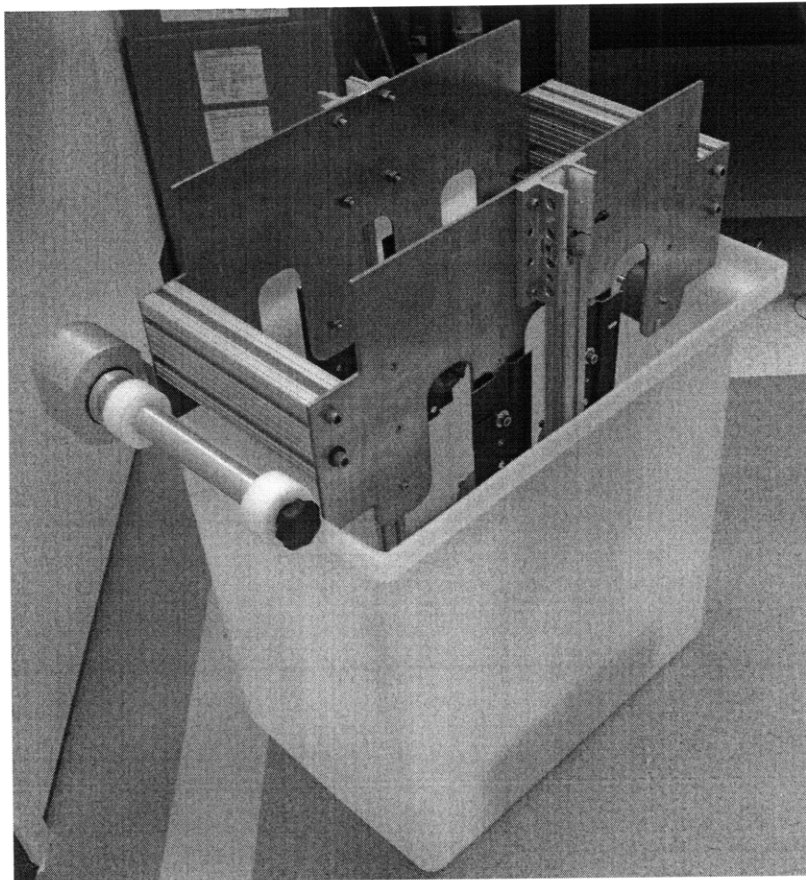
The assembled etching machine prototype with some minor modifications to reduce etchant volume. Most of the parts for were manufactured at the MIT LMP shop using a CNC waterjet cutter, milling machines, and lathes.
